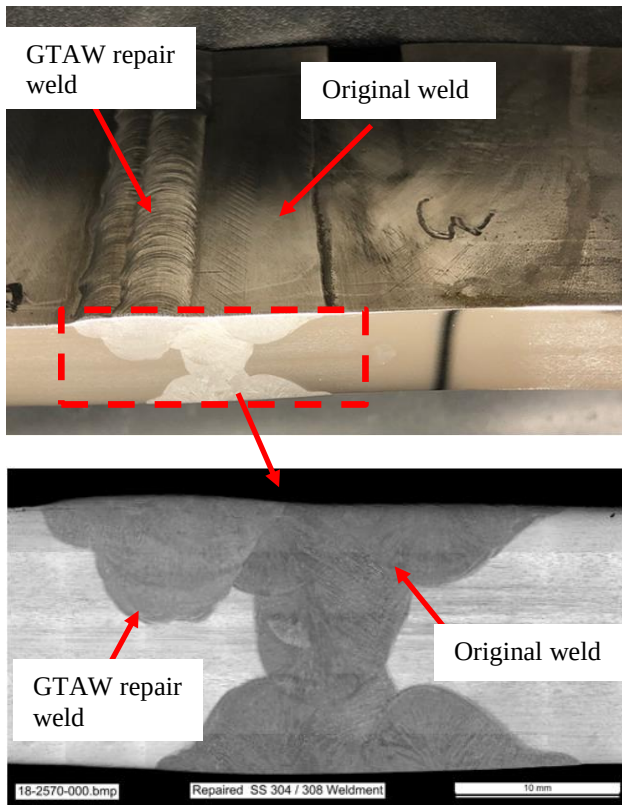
Repair welding detail (top). Micrograph of specimen where repair and original welding microstructure is revealed (bottom).
